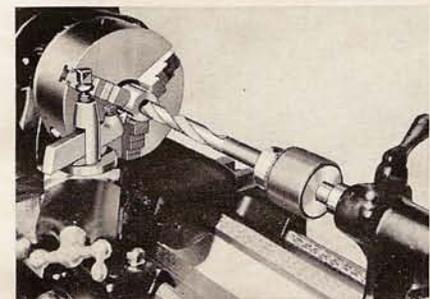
Drilling Hole in Bushing. Drilling of All Kinds can be Done in the Lathe.
